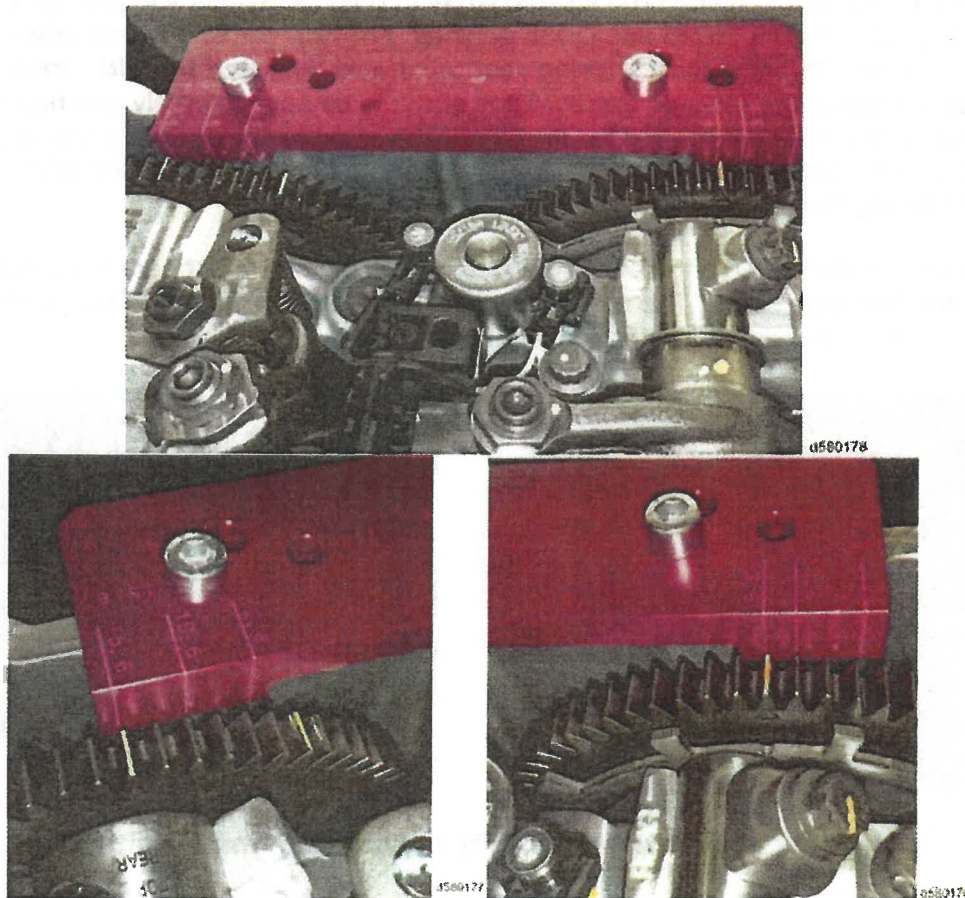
Comparing indicator marks on camshaft gears with indicator lines on timing plate. DD15/DD16 engine shown.
